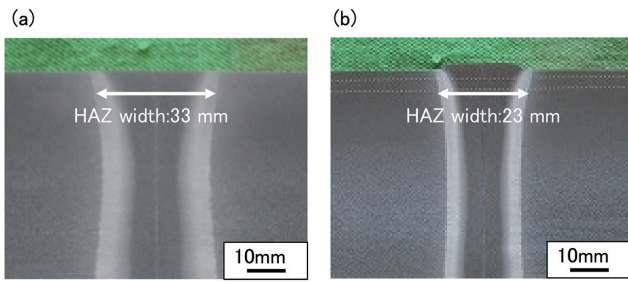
Cross-sectional macrostructure of FB welds
